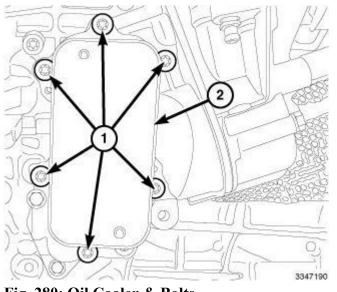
Oil Cooler & Bolts Courtesy of CHRYSLER GROUP, LLC
